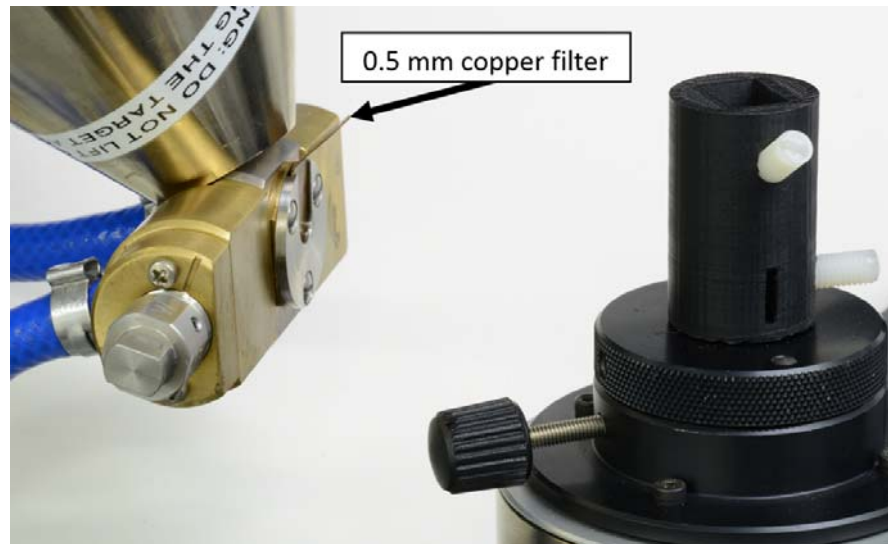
Measurement artefact assembly mounted in the Nikon XT H 225. Reproduced from [18].
